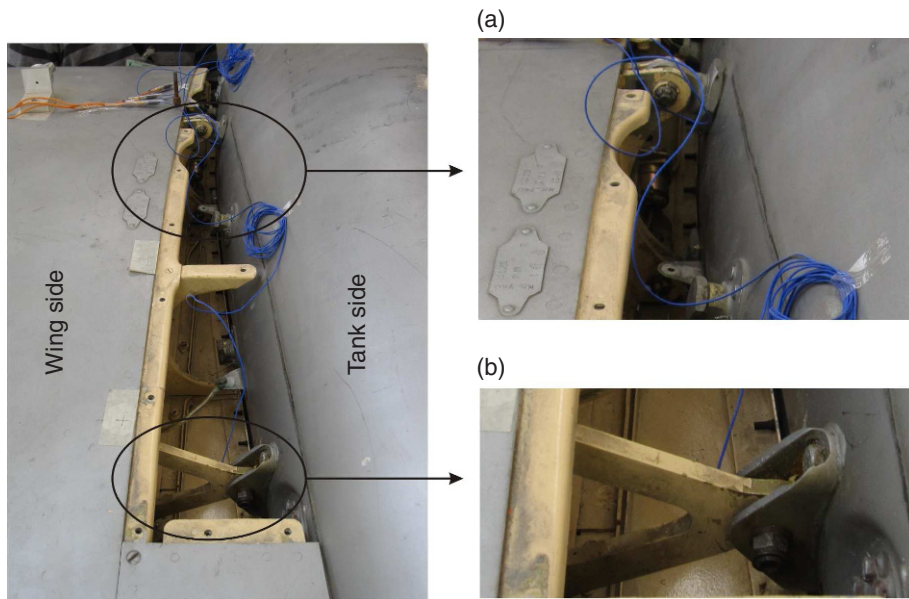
Connection between external fuel tank and wing tip (top view). Close-up of (a) front and (b) rear bolted attachments.
